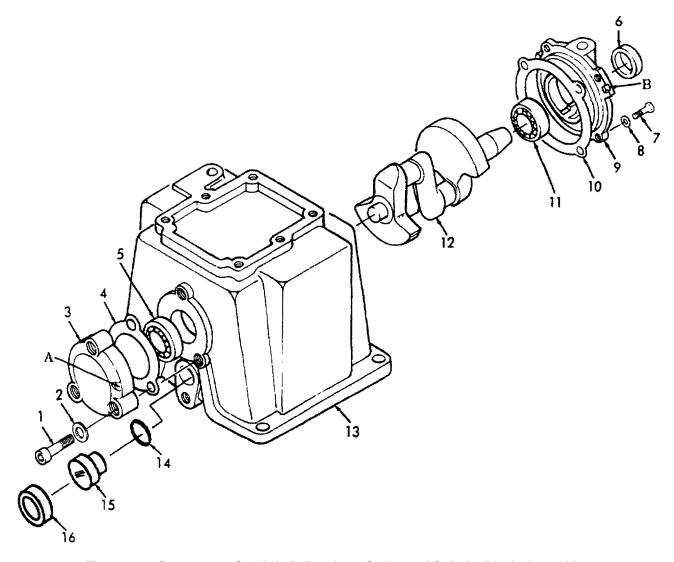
Compressor Crankshaft, Bearings, Seals, and Cylinder Block, Assembly.
